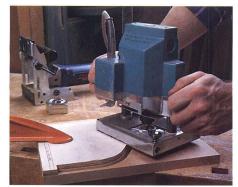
After clamping the template to your panel, rout the groove for the tambour door using a 5/16" straight bit with a 1/2" guide bushing.
